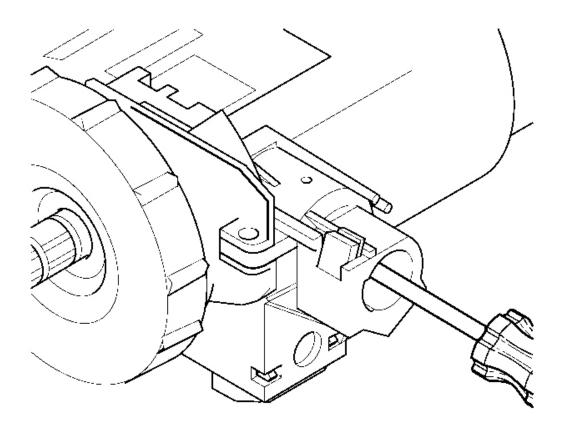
Using Screwdriver To Rotate Lock Cylinder Housing Gear Courtesy of GENERAL MOTORS CORP.
